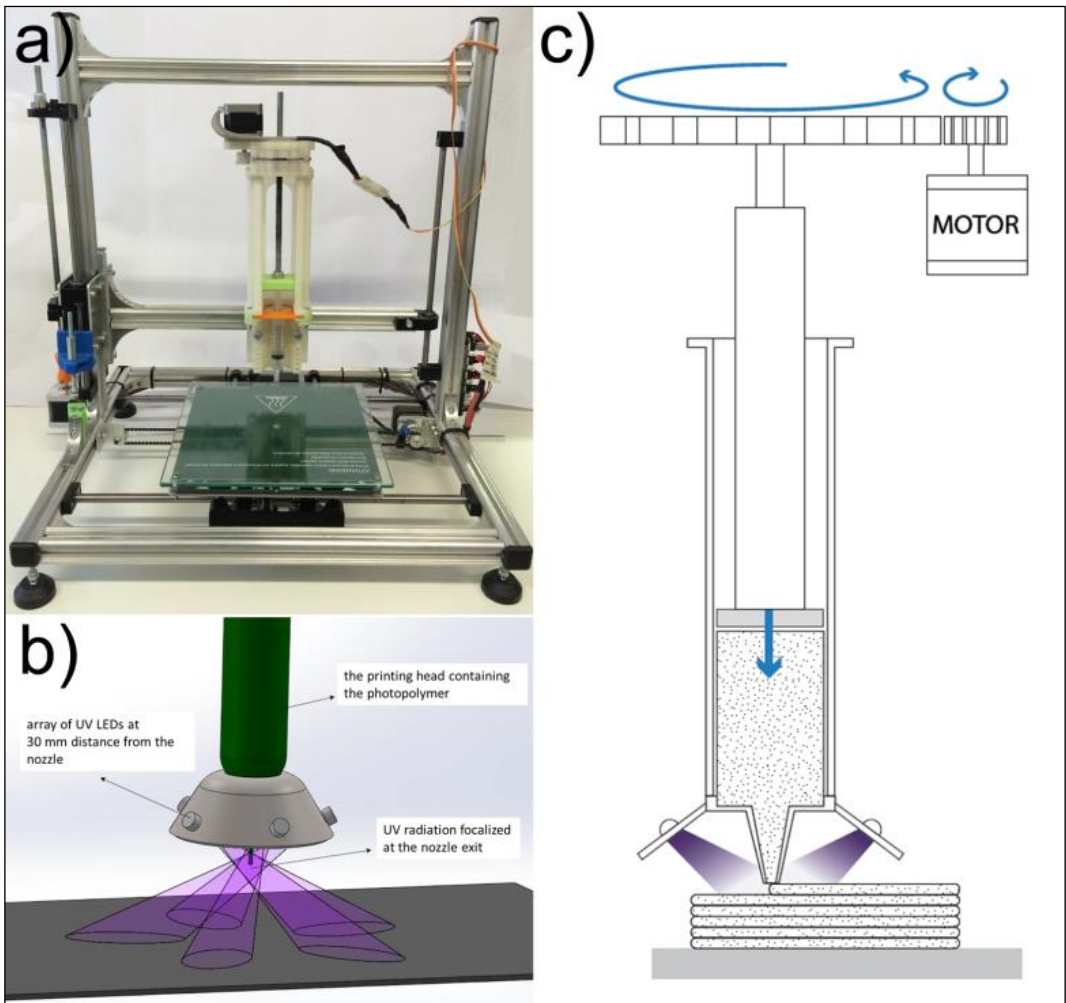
A) THE LOW-COST HOME-ASSEMBLED MODIFIED 3D PRINTER EMPLOYED IN THIS WORK. B) RENDERING OF THE PRINTING HEAD EQUIPPED WITH THE ARRAY OF FIVE UV LEDES. C) SCHEMATIC REPRESENTATION OF THE EXTRUSION MECHANISM.
